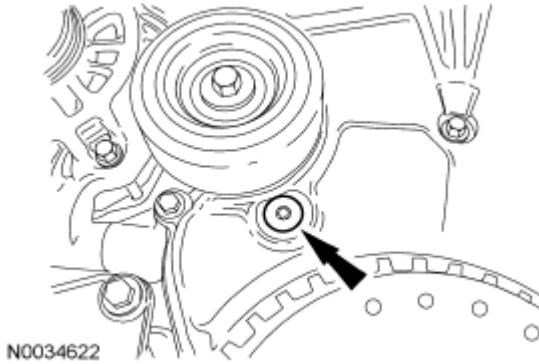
Locating Lower Front Cover Timing Hole Plug
